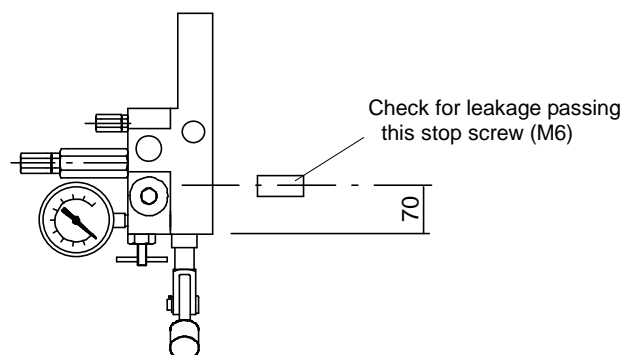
Check for leakage passing this stop screw (Only for valve size 52-216 l/min)
